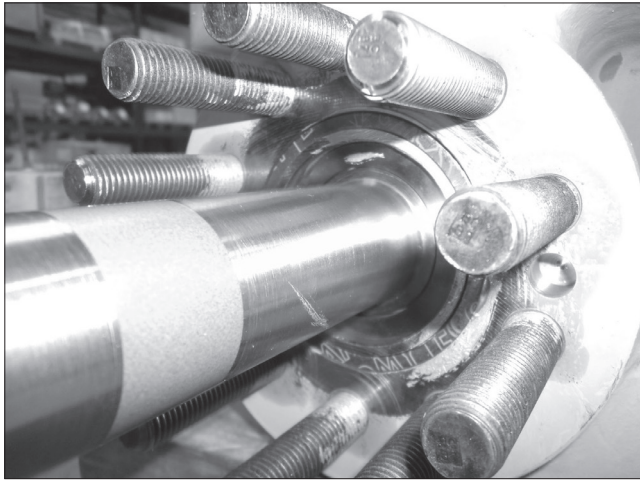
Remove the sealing ring and the actuator shaft (107, 401)
